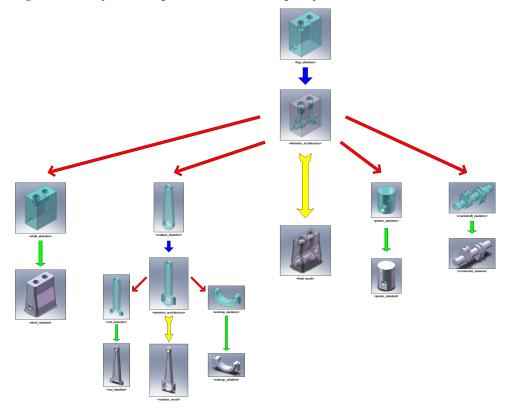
The top-down design of the crank-connecting rod-piston mechanism
